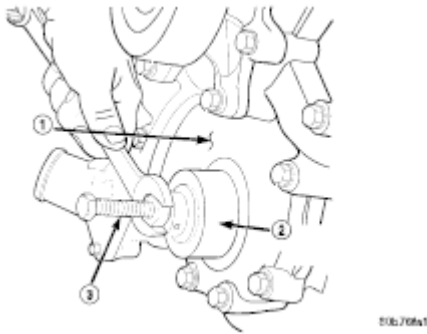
Installing Crankshaft Front Seal Using Special Tool 8348 And 8512
